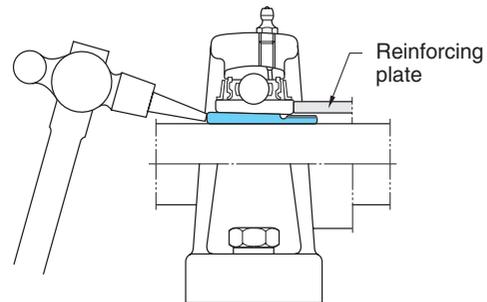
Fitting adapter sleeve to bearing with tapered bore
